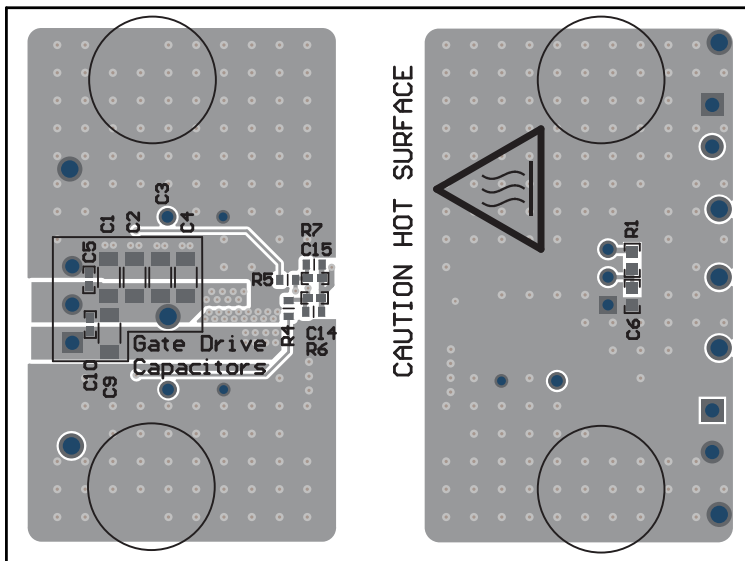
UCC14240EVM-052, PCB Bottom Layer, Assembly (mirrored view)
